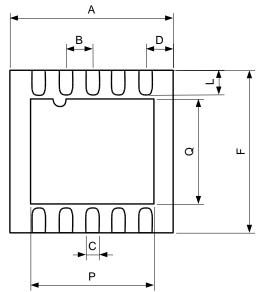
DFN-10 Package dimensions (bottom). Note that the saddle need to be connected to GND on the PCB.
